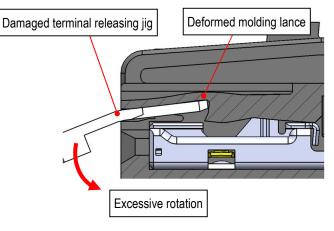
Deformed molding lance, Damaged releasing jig
